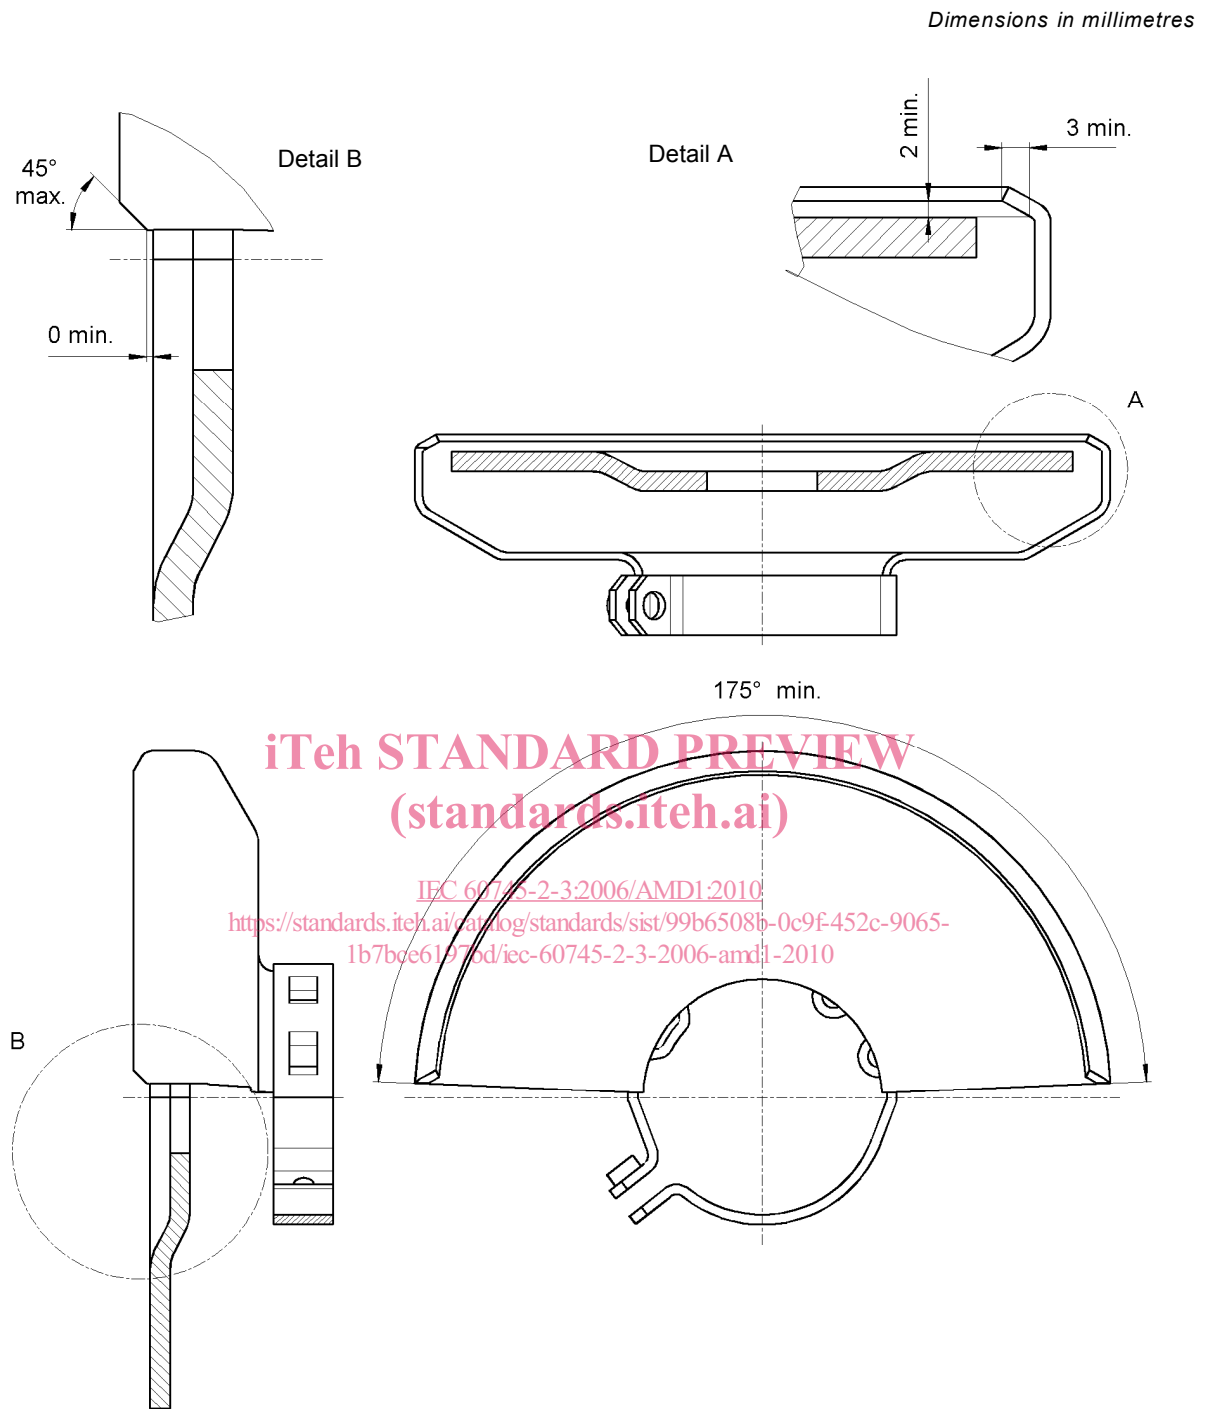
Typical guard design with front lip for wheel Types 27, 28 and 29
